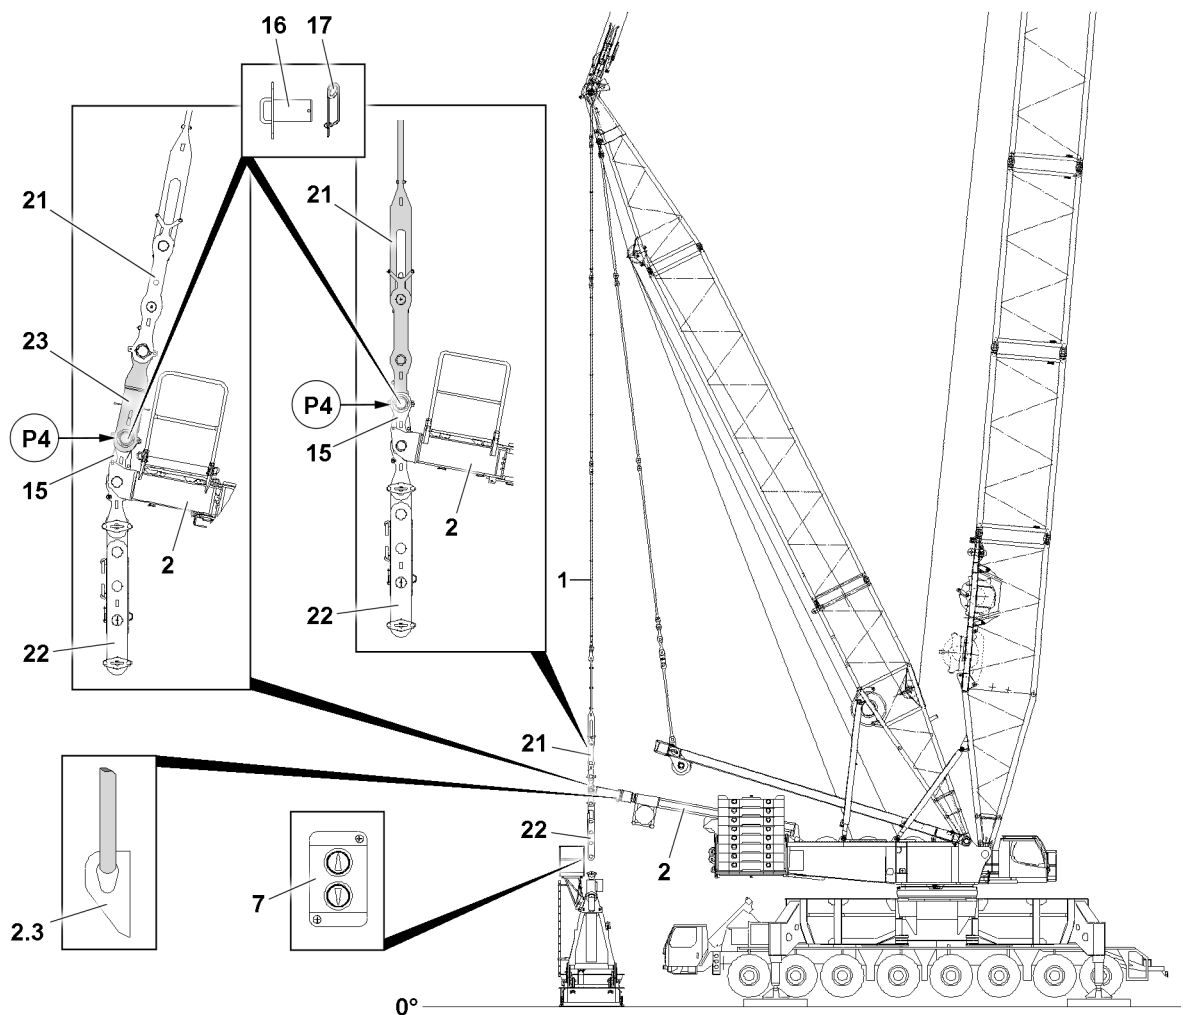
Installing the suspended ballast guide 2 on the derrick ballast guying
